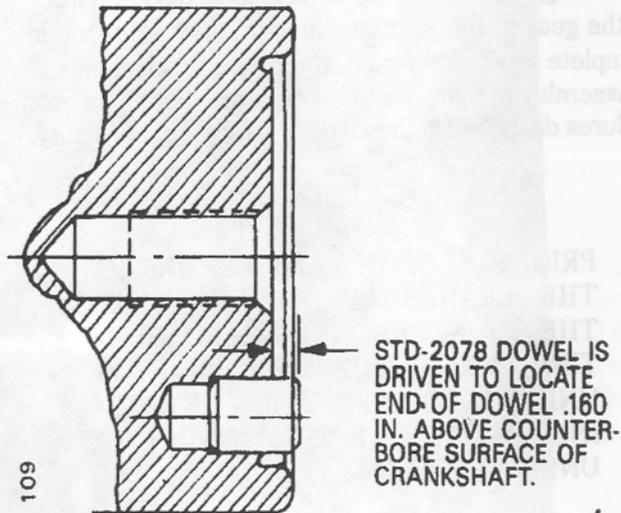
Section Thru End of Crankshaft Showing Driven Height of STD-2078 Dowel
